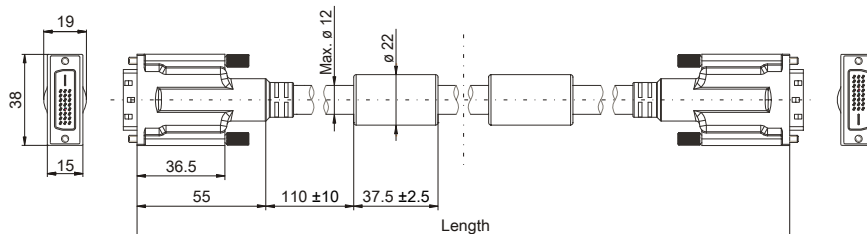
5CASDL.0xxx-03 ≤ Rev. D0 - Dimensions
